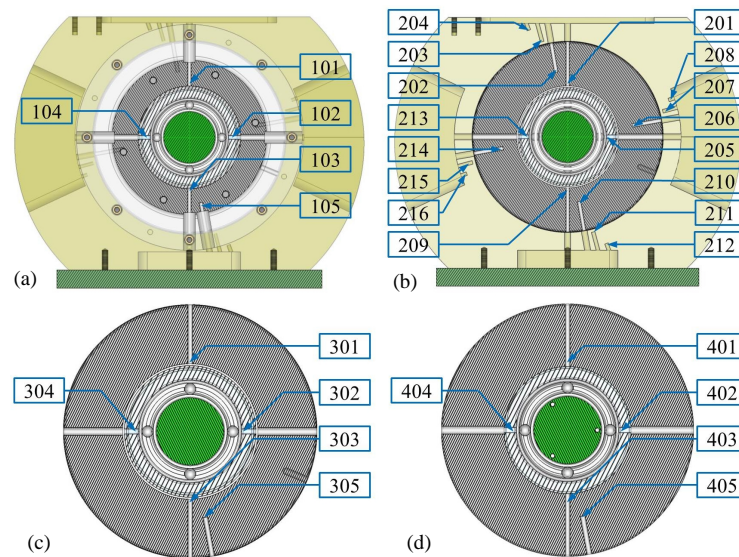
Sensor positions: (a) Section 1; (b) Section 2; (c) Section 3; (d) Section 4.
